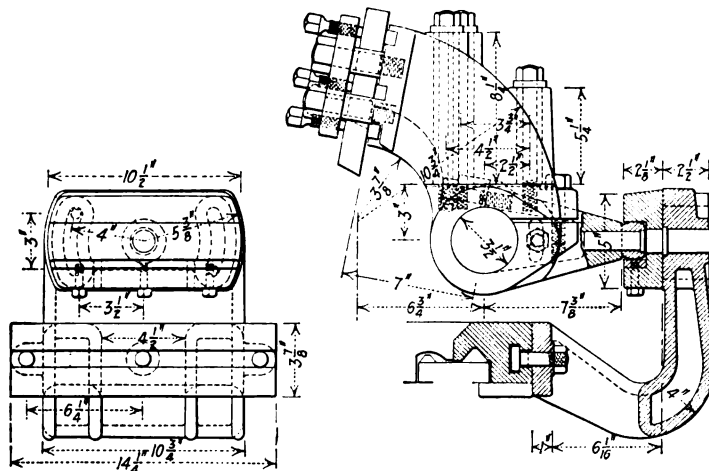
DETAILS OF BACK ARM ATTACHMENT
